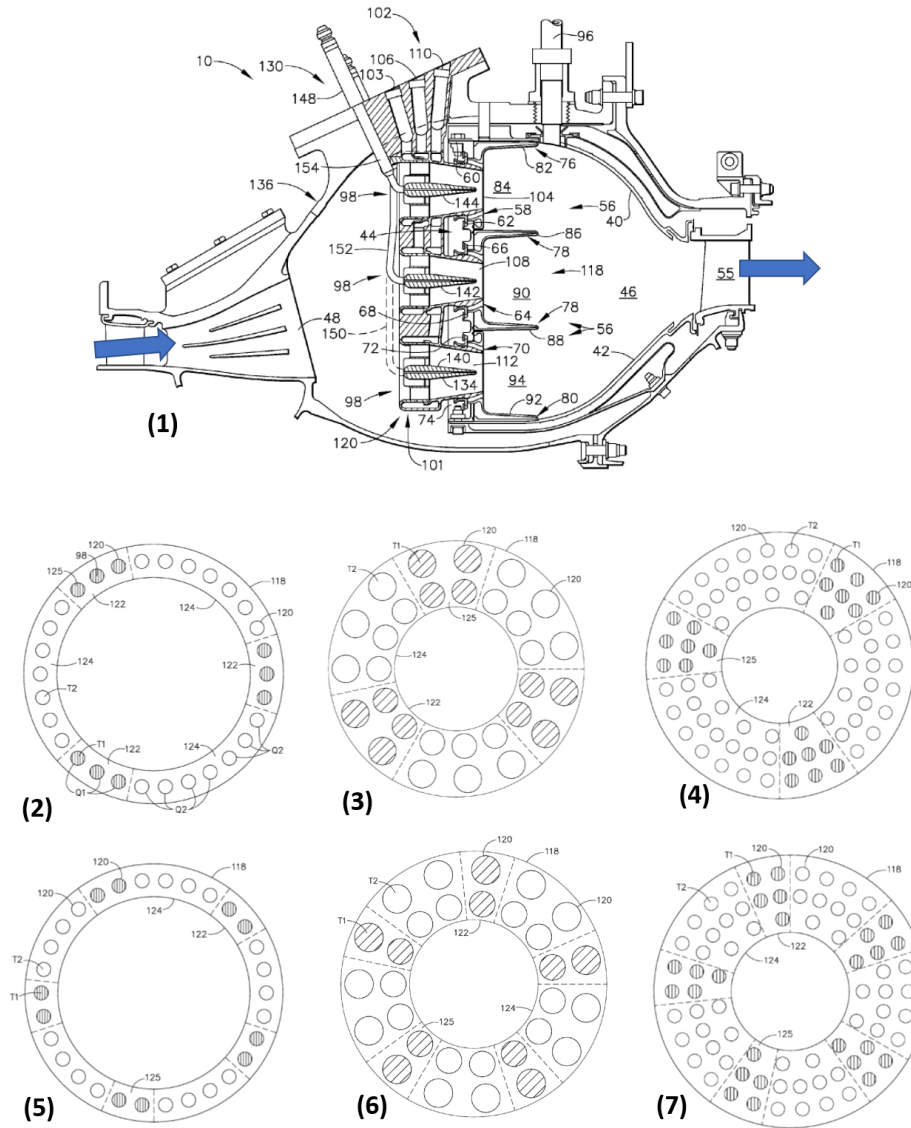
An example of a combustor of a gas turbine engine. Patent US 8,631,656 B2. (1) a cross-sectional view illustration of a gas turbine engine combustor with an array of fuel burners. (2) to (7) is six sequential arrays of injectors of the combustor.
